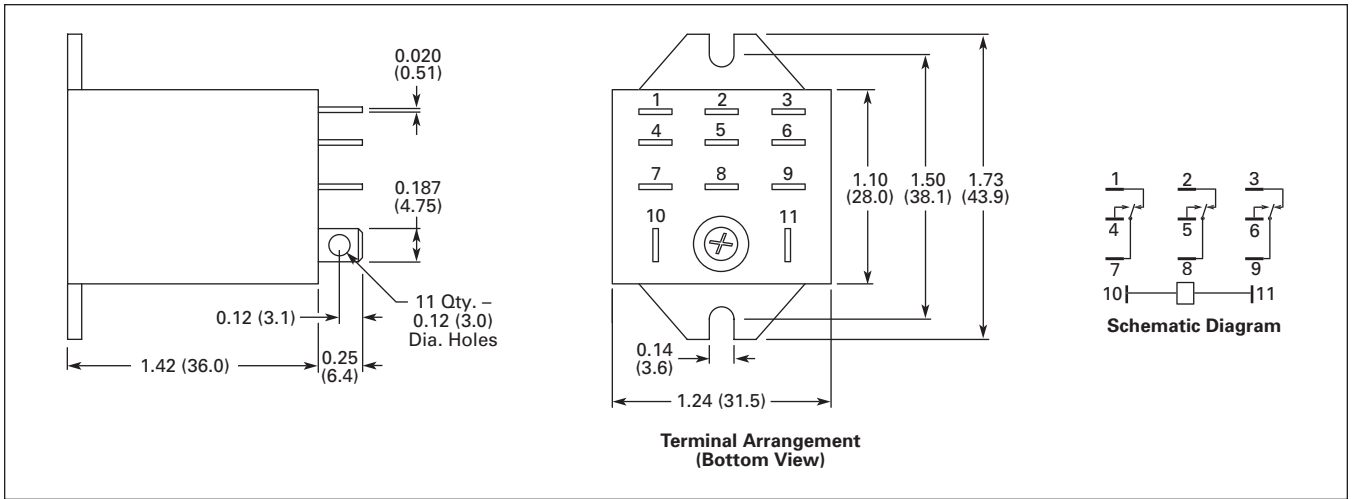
D7PR34 — Approximate Dimensions in Inches (mm)
